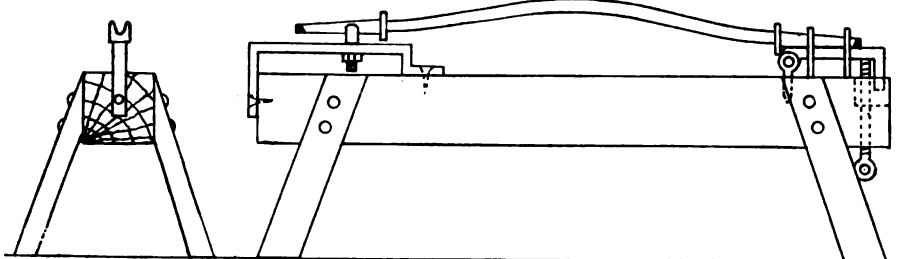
TOOL USED IN SHAPING GAFFS.
